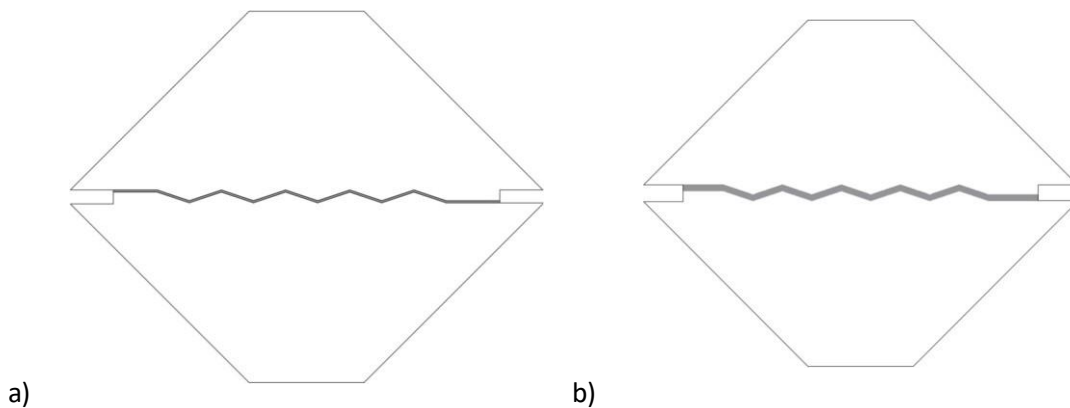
a) A drawing of the 1mm infill and the plaster mould b) A drawing of the 3mm infill and the plaster mould
